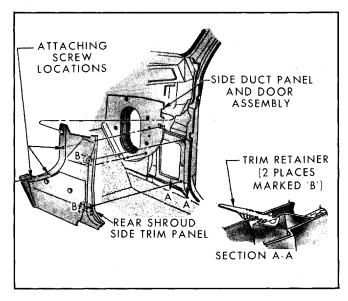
Rear Shroud Trim Panel - Right Side
